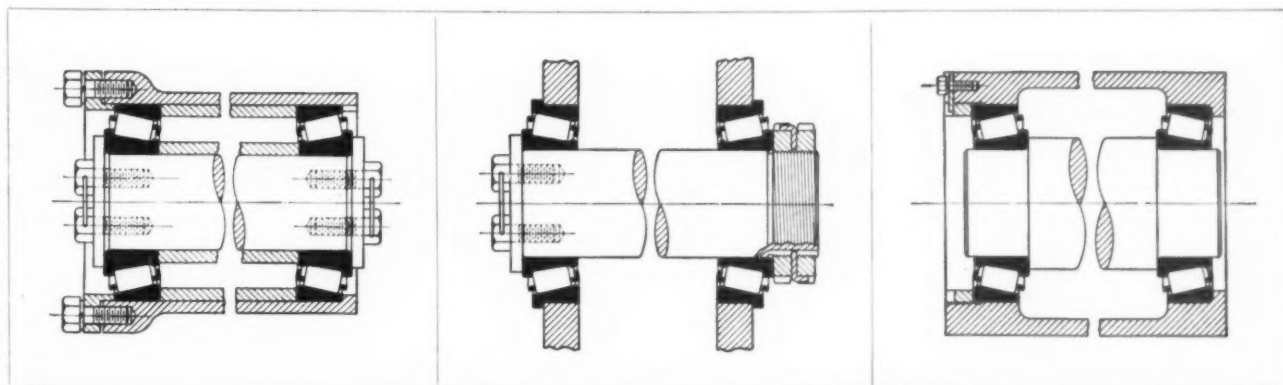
illustrates a simple mounting in which the bearing cups are seated against a shoulder, knock-out slots being provided to facilitate disassembly. It will be noted that the left hand (inner) bearing has a larger bore than the one at the right (outer), and backs up against a shoulder on the shaft. It is always preferable to have the inner bearing slightly larger than the outer one to avoid the necessity of pressing the cone a considerable distance along the shaft.
